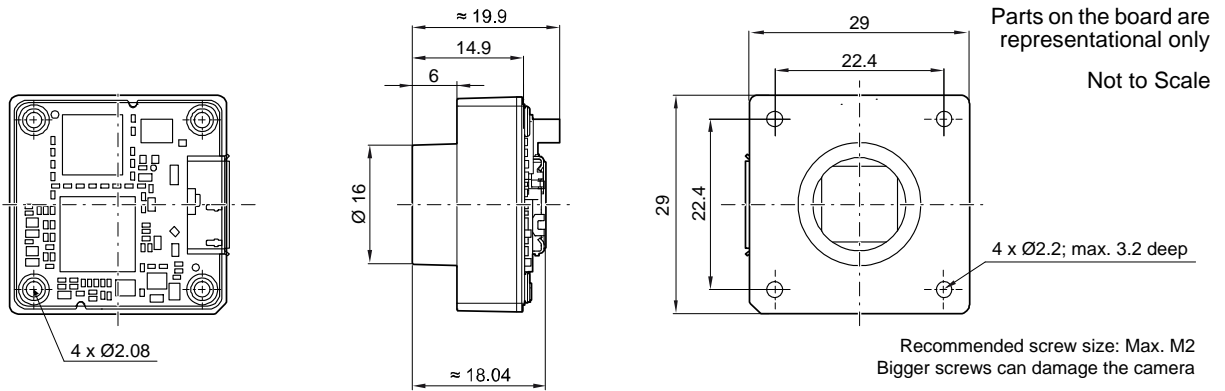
Mechanical Dimensions (in mm) for Cameras with S-mount Lens Adapter
